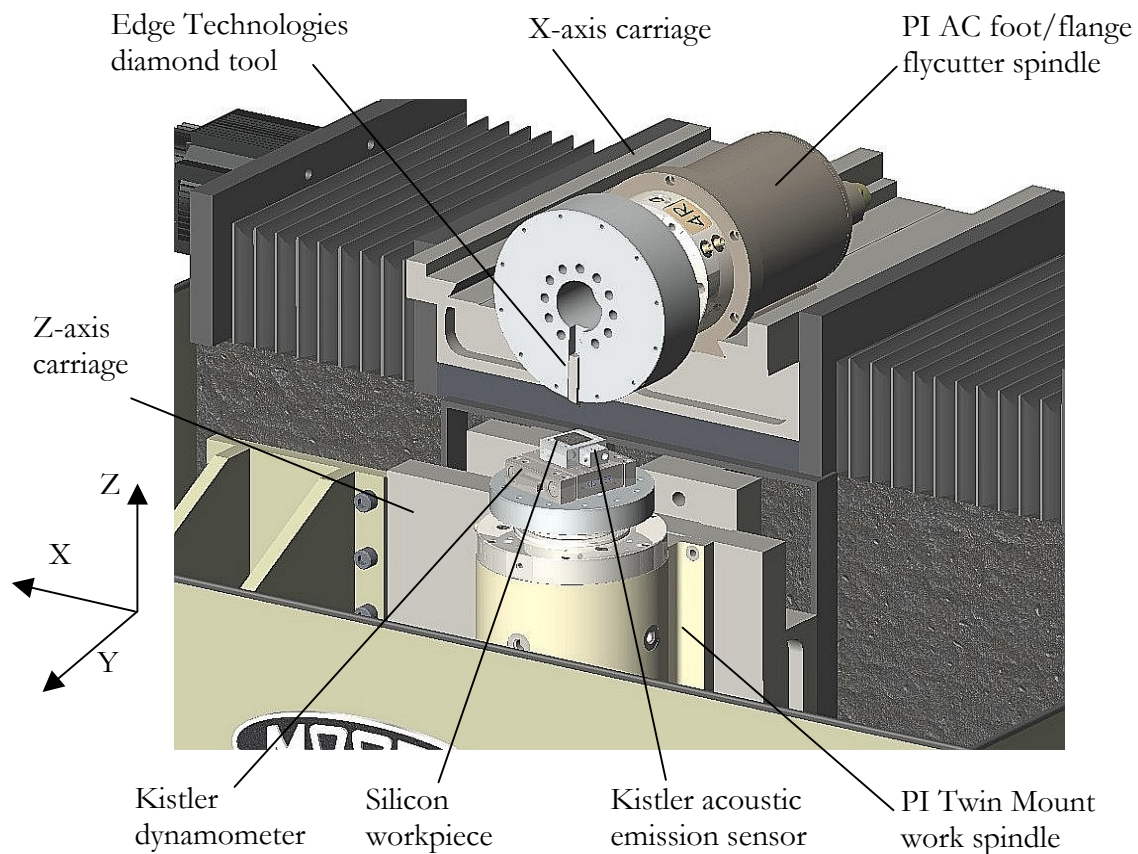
Close-up view of the flycutter spindle, workpiece spindle, and instrumentation.
